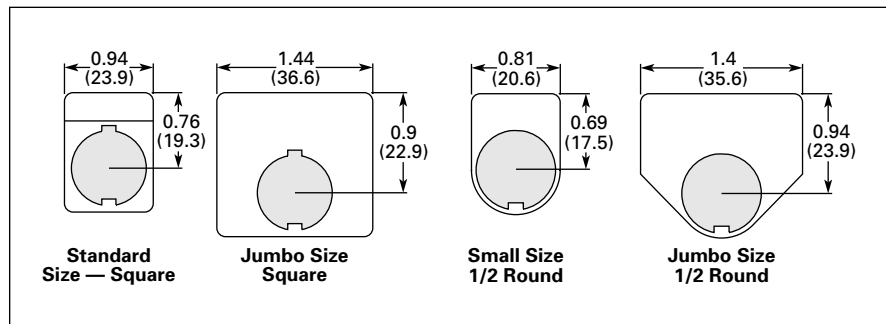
Legend Plate Approximate Dimensions in Inches (mm)
